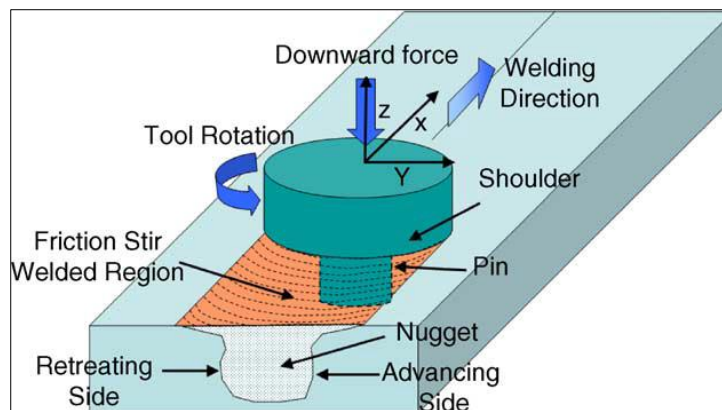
Schematic drawing of Friction Stir Welding (Mishra and Ma, 2005)
